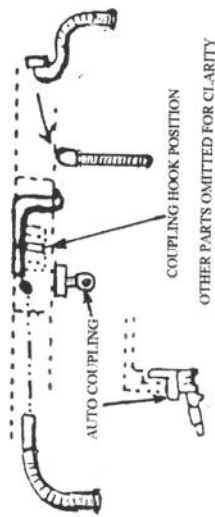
LOCO END, CAST AUTO COUPLING, STEAM & VACUUM PIPES
